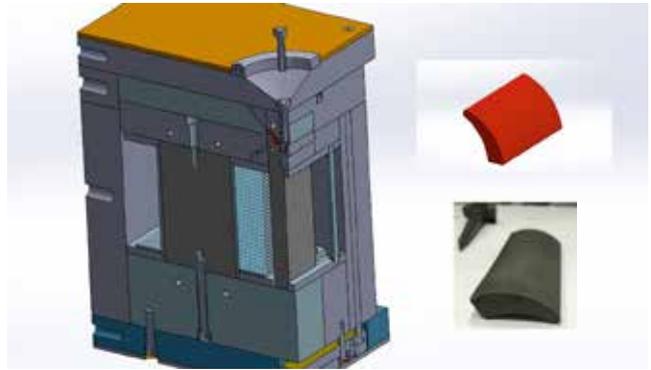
Left: Magnetizing mold, right: specially shaped magnet, design and injection molded
